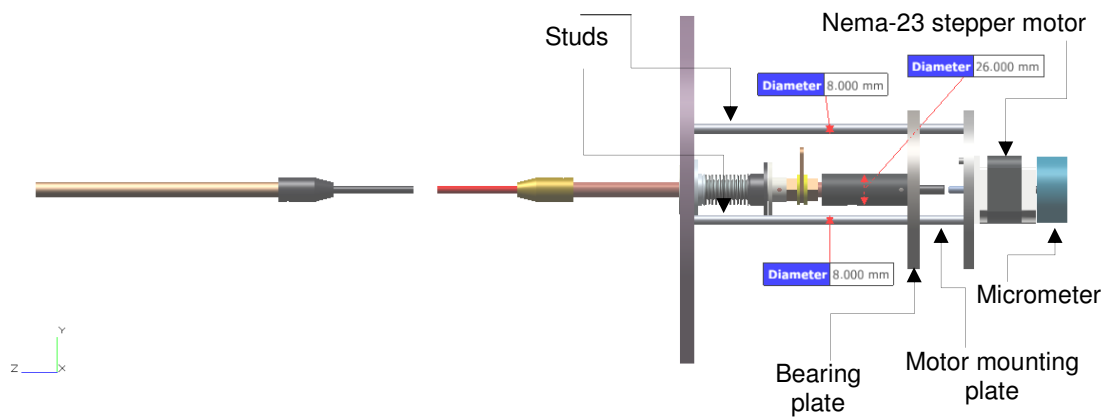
Three studs, motor mounting plate, bearing plate and Nema 23 stepper motor
